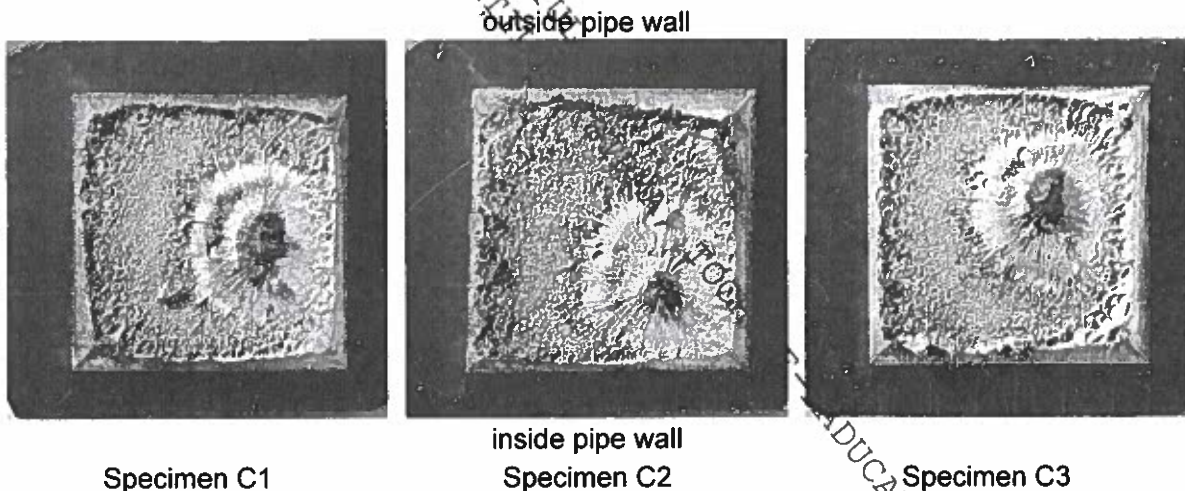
Top view of the fracture surfaces (one half of each specimen)
